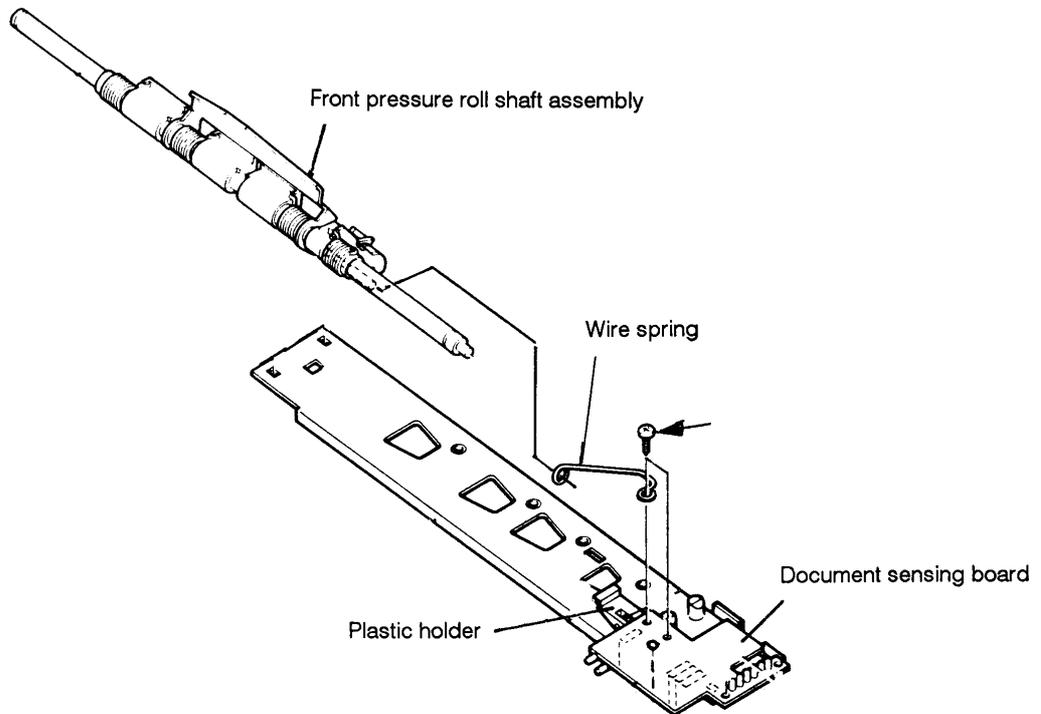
Removing the document sensing board (this figure is only intended for parts identification)
